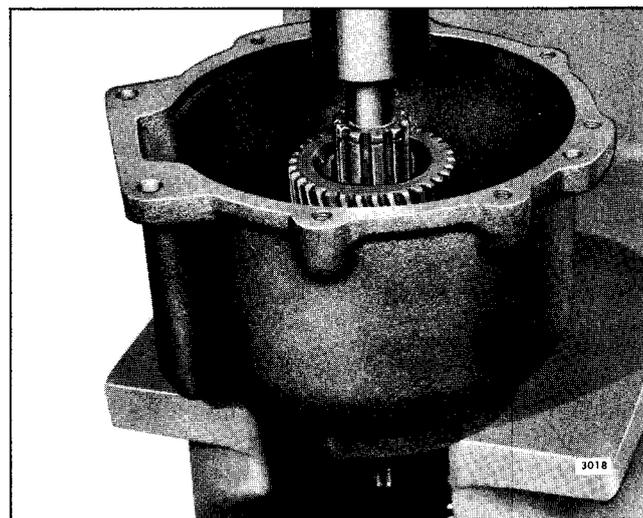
Removing Reduction Gear Drive Shaft Roller Bearing Cone and Cup from Gear Housing (1.5:1 Ratio)
